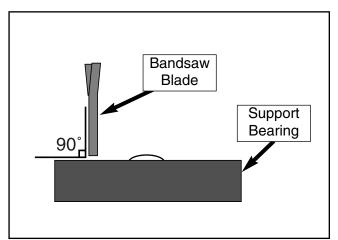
Blade should be perpendicular (90°) to the face of the support bearing.
